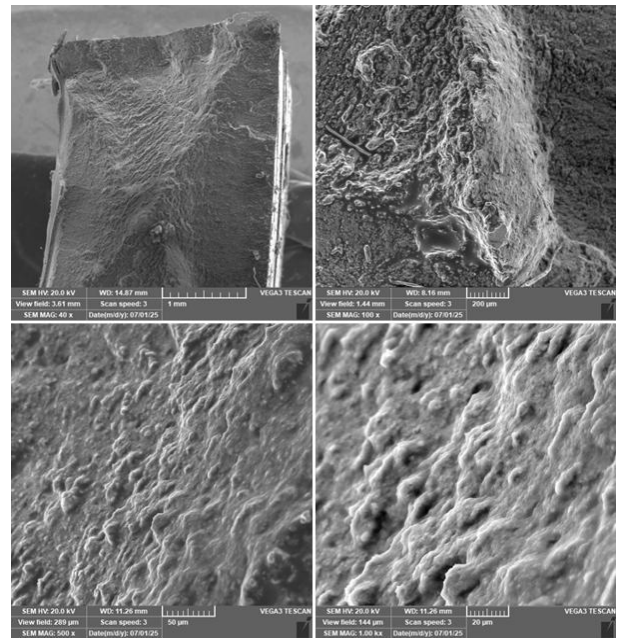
Fracture surface of the "L80 hydrogen-charged" sample
